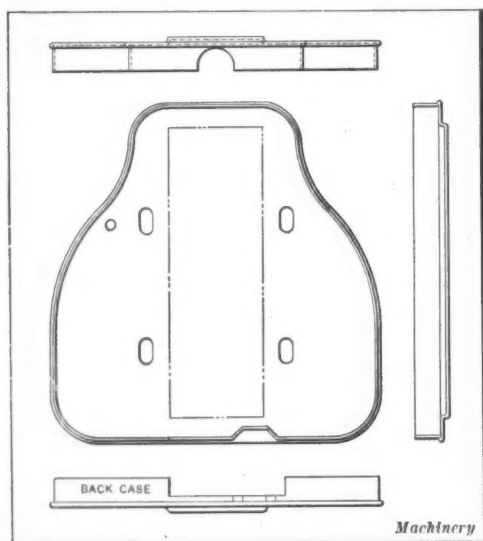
Stamp Cover made in Dies shown in Figs. 2 and 4
